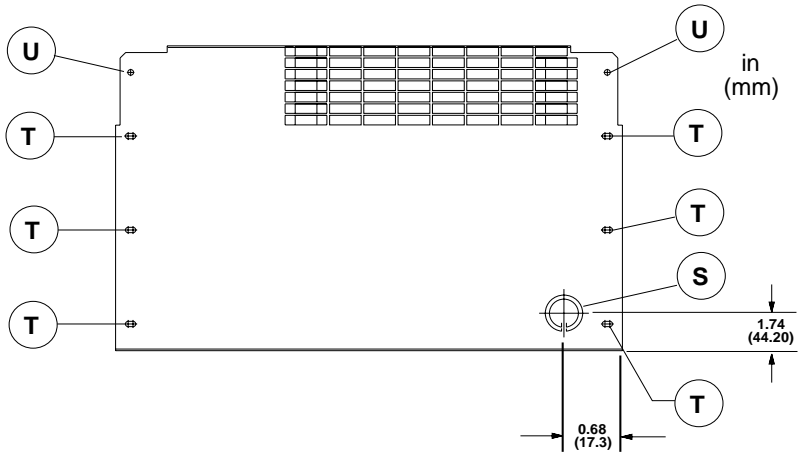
Mounting Dimensions: VW3A66715, 716, 717, 718
